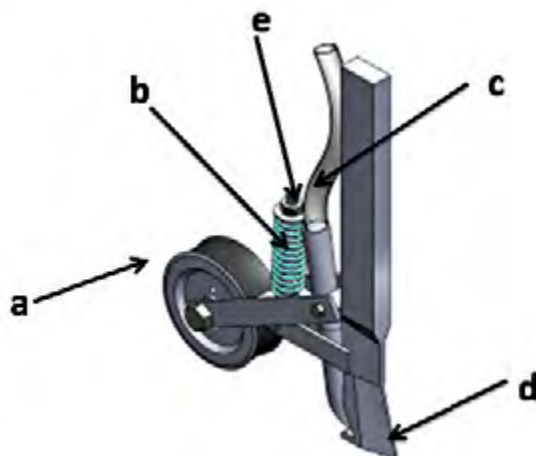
Furrow opener assembly. a) Press wheel b) Spring c) Seed depositing tube d) Furrow opener e) Bolt for spring adjustments.
